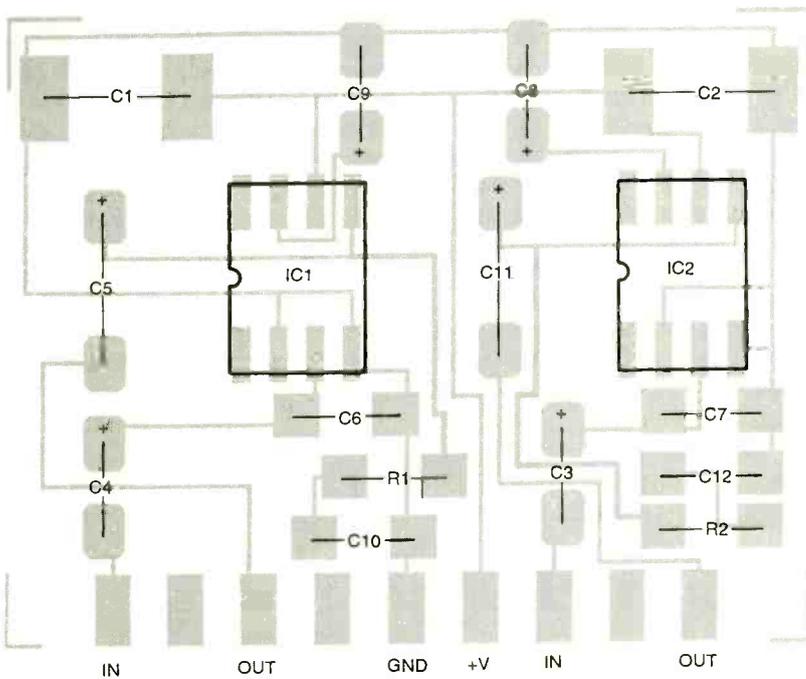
Shown here is the parts-placement diagram for SIP-7. Aside from component orientation, when assembling the surface-mount SIPs be sure that all the components have good solder joints and that there are no shorts between adjacent component pads.
